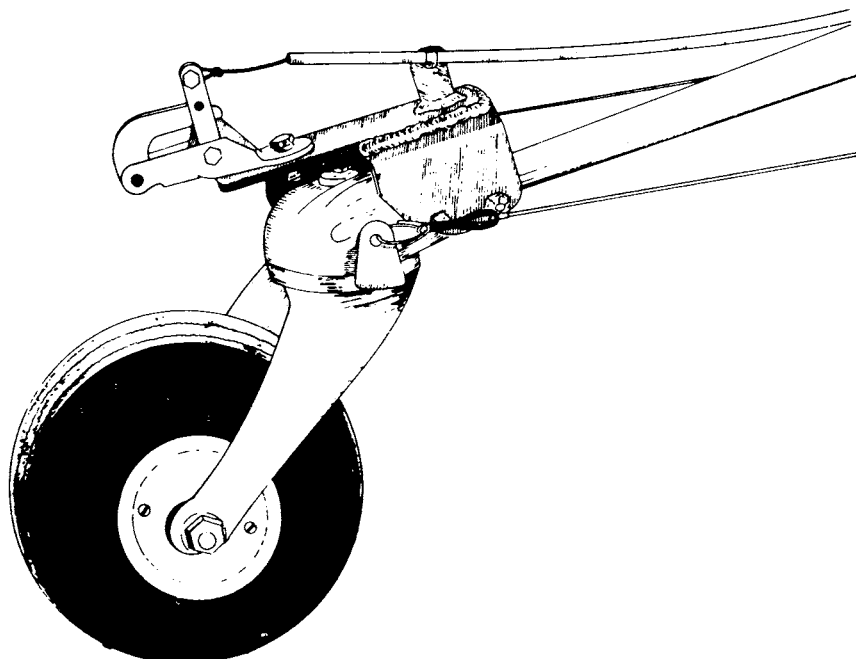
Conventional gear aircraft—tubular spring type tailwheel.
